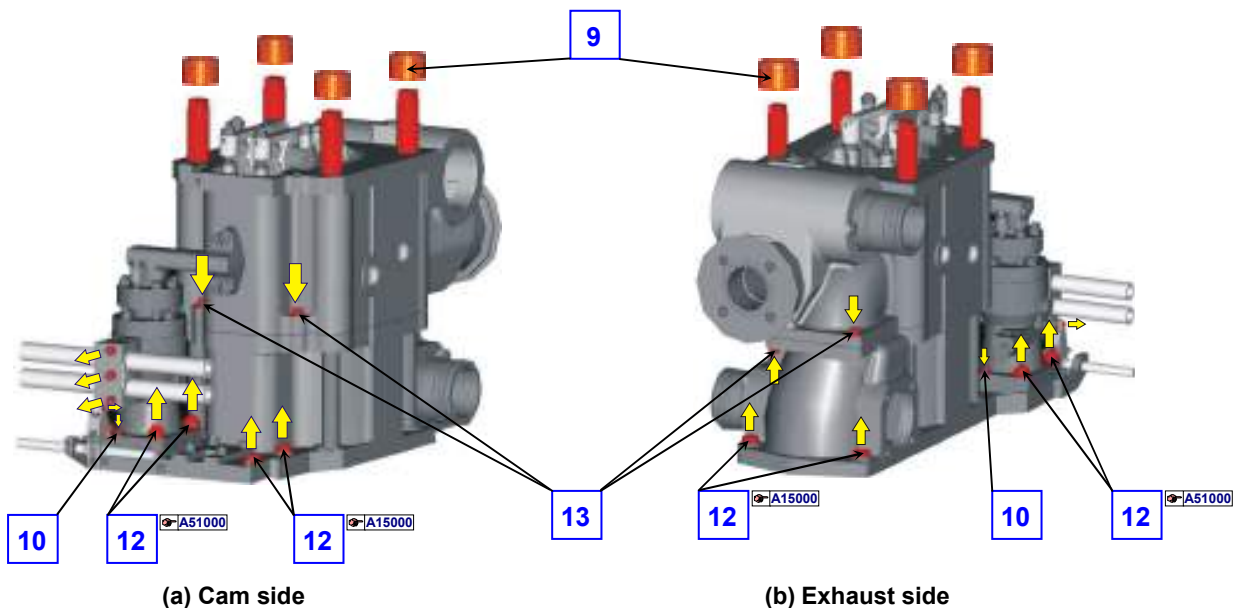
Fix water jacket to cylinder head with screws (워터 자켓과 실린더 헤드의 고정)
